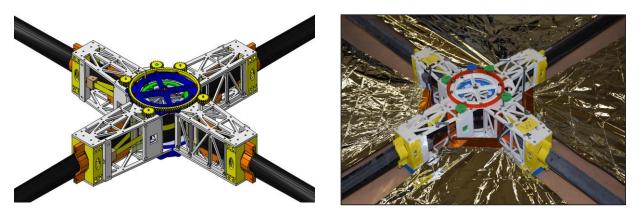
CAD-model of the modular boom deployment mechanism with the sliding core interfaces at the tips of the box-shaped frames (left) and 3D-printed prototype (right).
